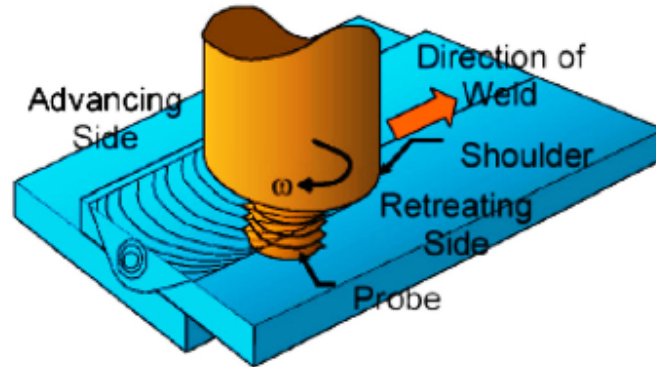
Schematic of the process: friction stir overlap welding process[26].
